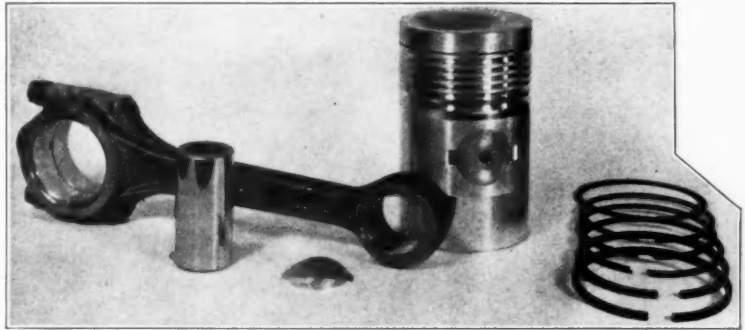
Connecting rod and piston assembly. Two oil rings above pin, four compression rings and groove to reduce heat transfer to rings.
